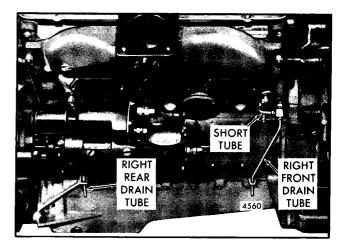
Air Box Drain Tube Mounting (8V Engine)
